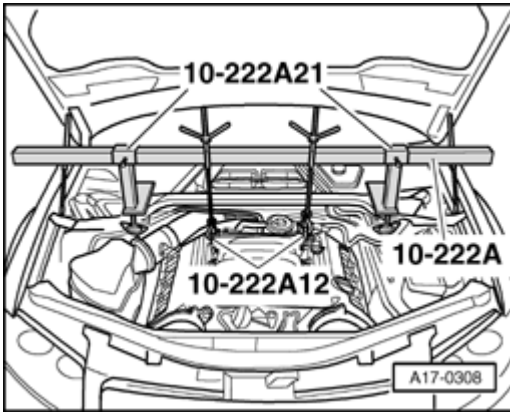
Securing Shackles 10 - 222 A/12 To Right Rear Engine Lifting Eyelets
